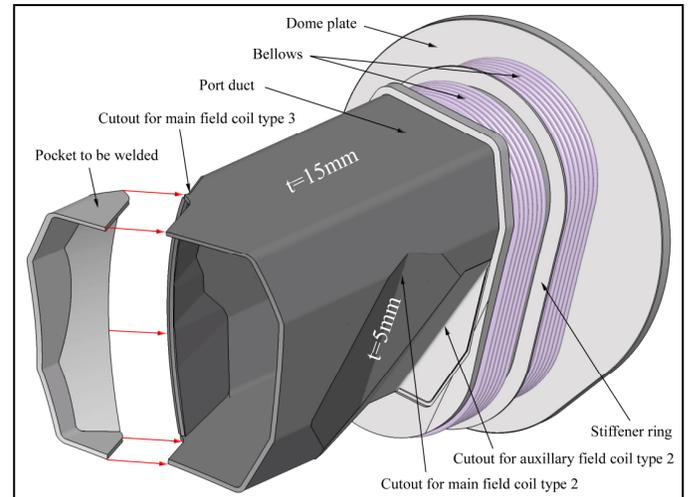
NBI port components to be assembled and welded in situ.
